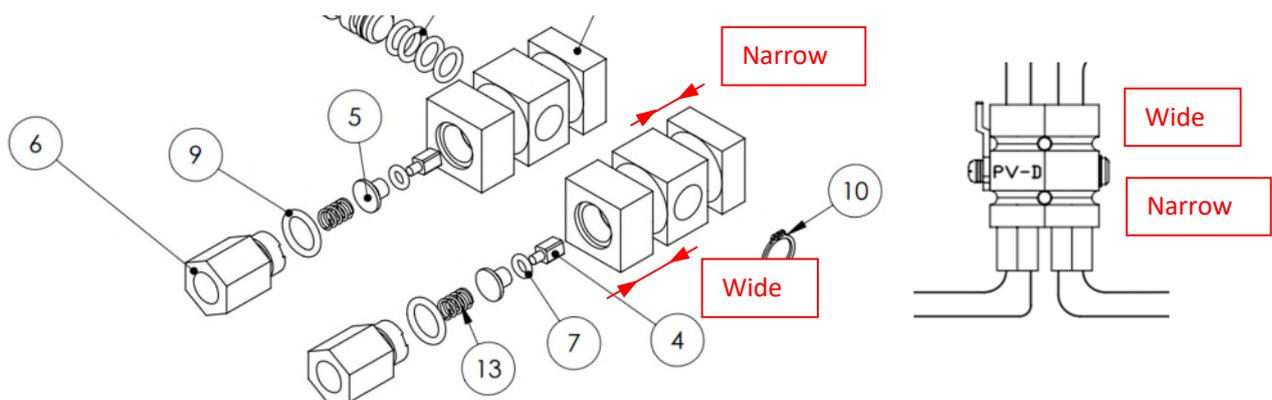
EXPLODED VIEW AND INSTALLATION OF THE VALVE
